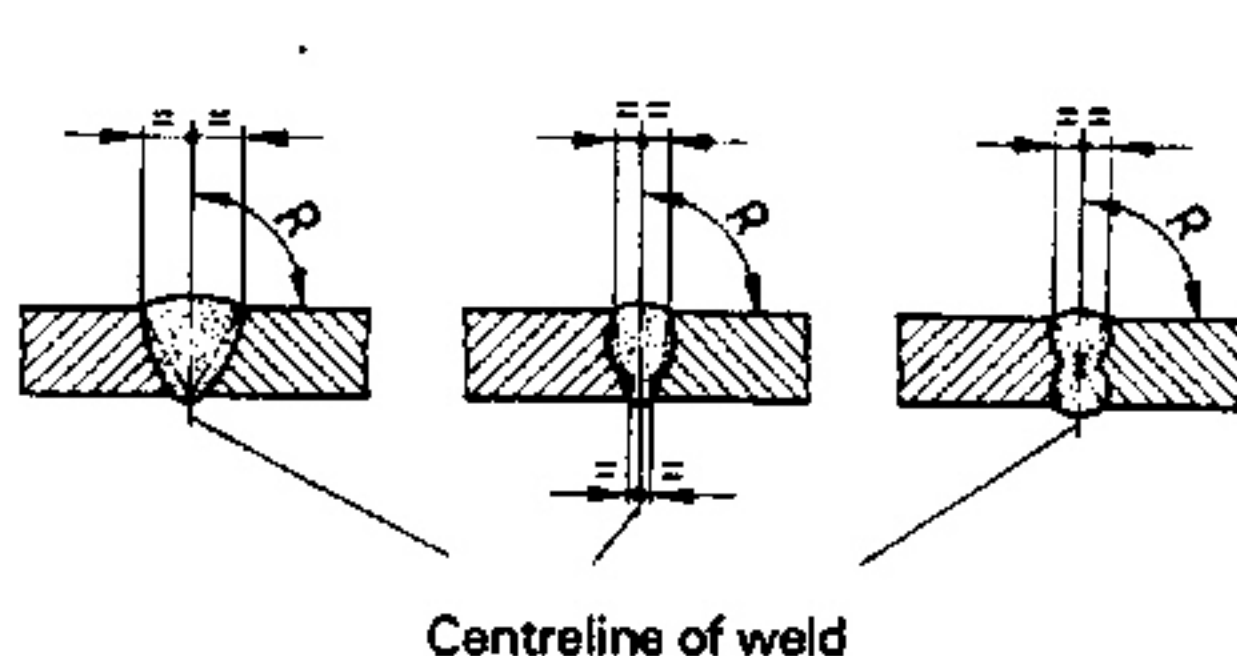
Examples of rotation ($R \approx 90^\circ$) of symmetrical butt welds with horizontal workpiece surface
